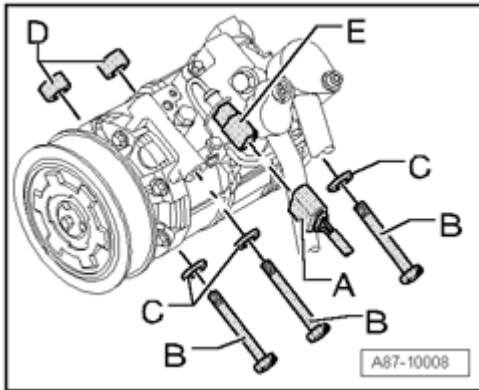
Identifying Connector, Mating Connector, And Bolts
